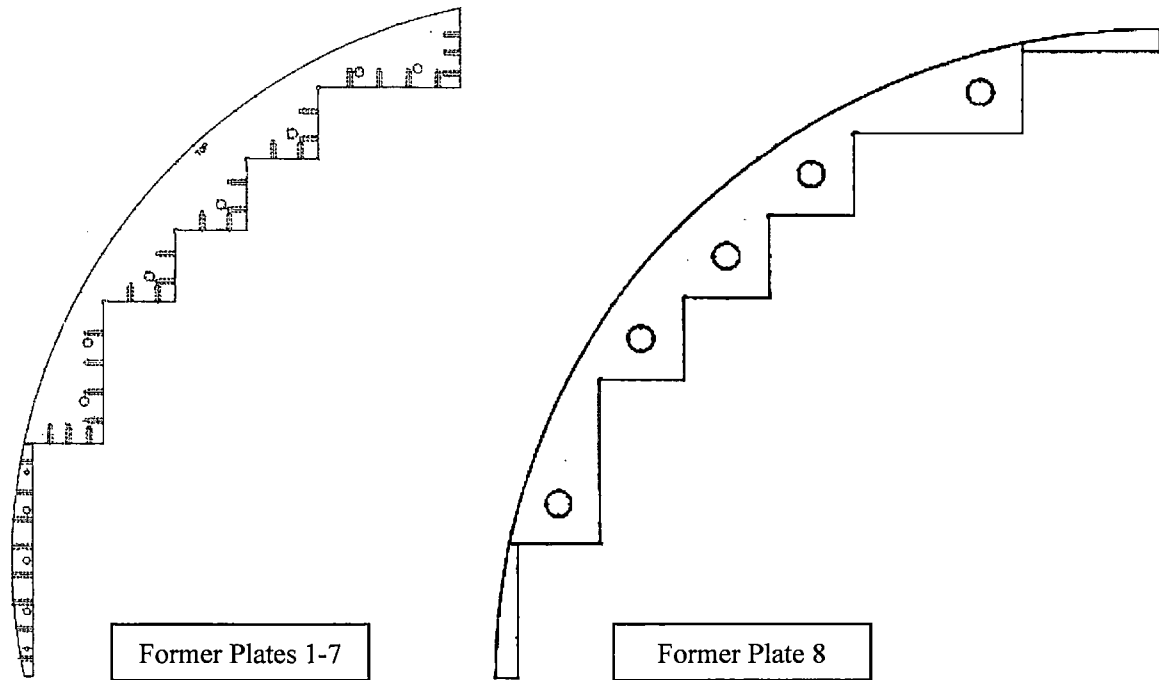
Westinghouse 3 Loop Converted Upflow Plant Former Plates
